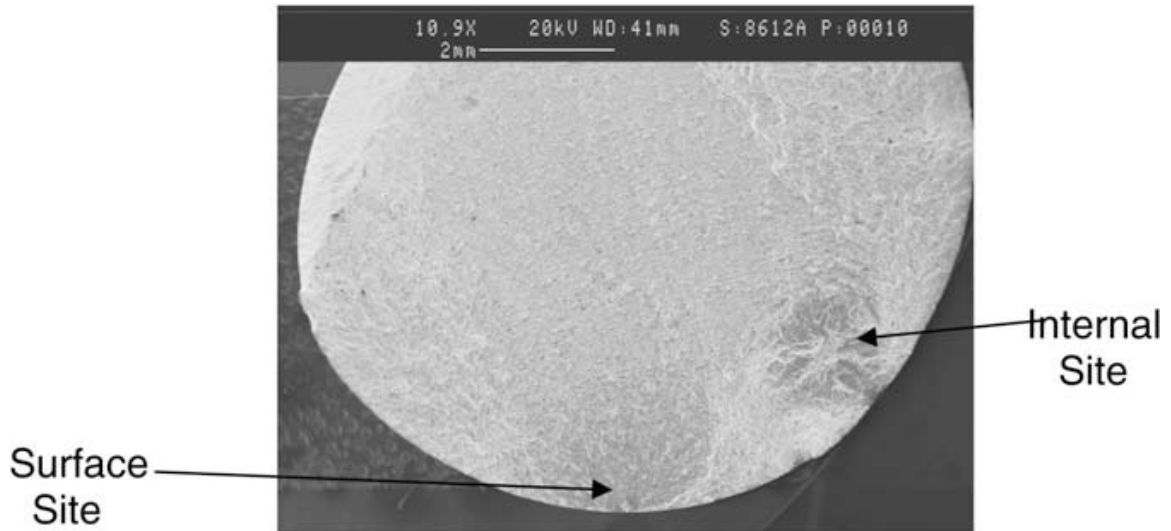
Fracture surface demonstrating competing surface and internal initiation sites [165].
